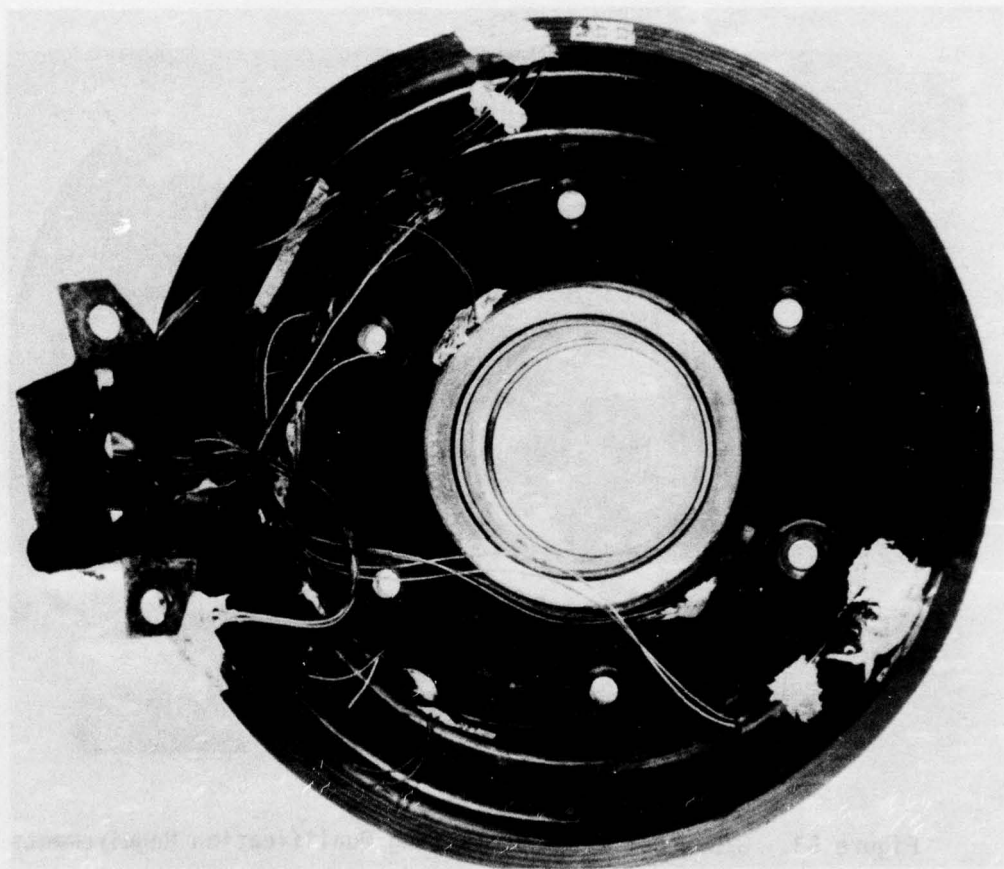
Hub Wheel Half after 1400 Mile Straight Roll and 400 Mile Camber Roll
